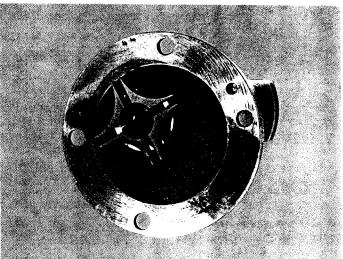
Partially disassembled Geneva movement showing the CAM and PIN mechanism.
